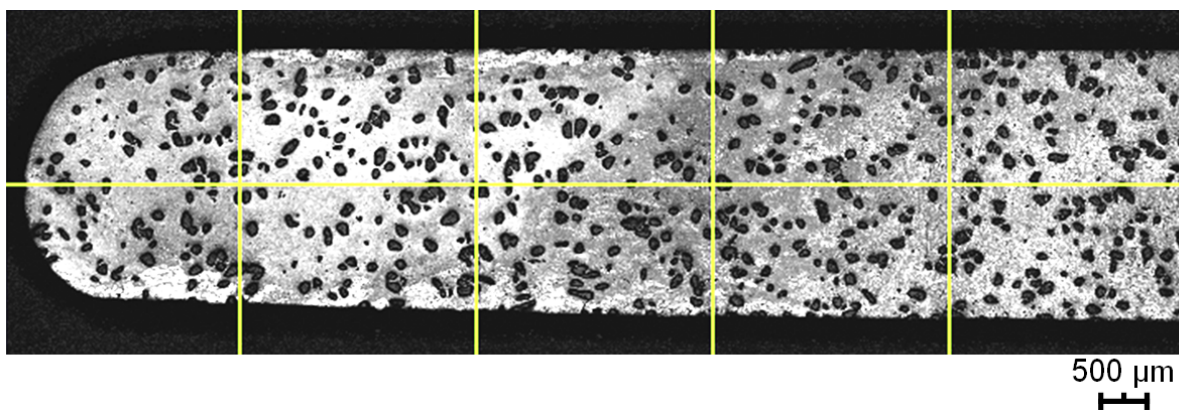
Example (10 parts of the honing stone B91) of surface sectioning and assembly by LSM
